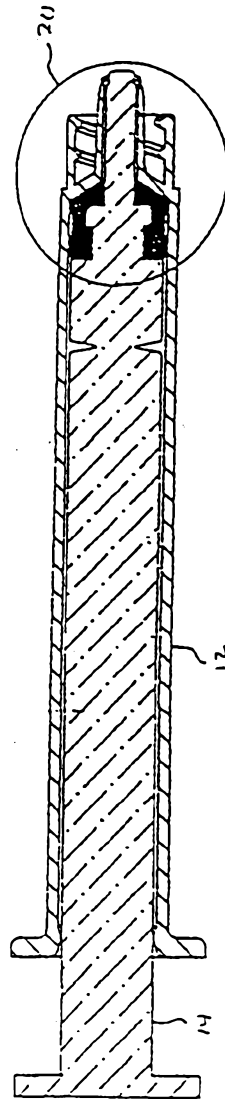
A BARREL, STOPPER & PLUNGER CROSS-SECTION
